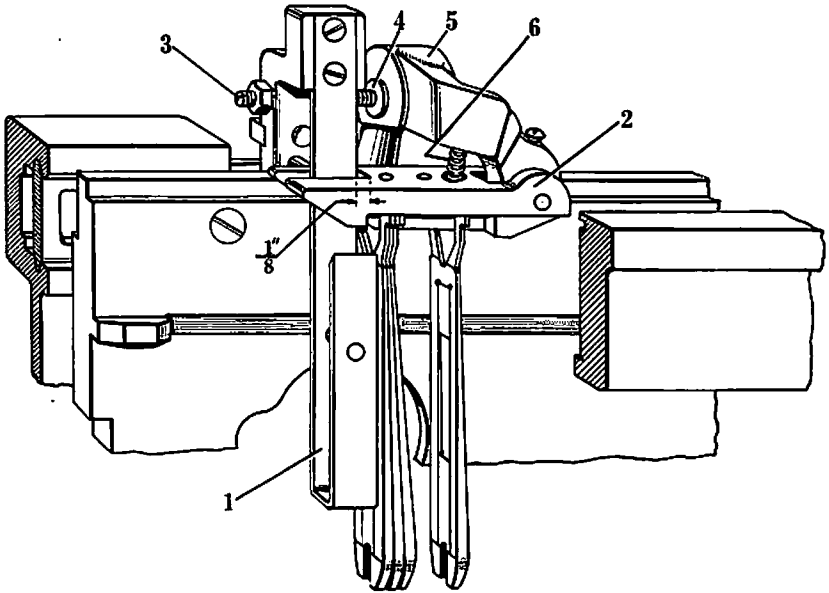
Second Movement of Transfer Levers. After the second elevator lifts the matrices out of the transfer channel, the elevator transfer lever and spaceband lever move together for the second time so that the spaceband lever pawl 2 will engage the spacebands. As the levers approach the end of their stroke, the elevator transfer slide finger 1 pushes the spacebands under pawl 2 against tension of spring 6. When the two levers meet, there should be $\frac{1}{8}$ " clearance between the right side of finger 1 and the bottom of the slot in pawl 2, as illustrated. This adjustment is made by means of screw 3 in the transfer slide.
